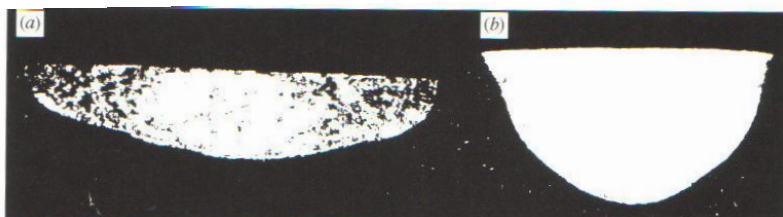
Photographs showing variable weld penetration and (a) poor weld penetration and (b) good weld penetration
